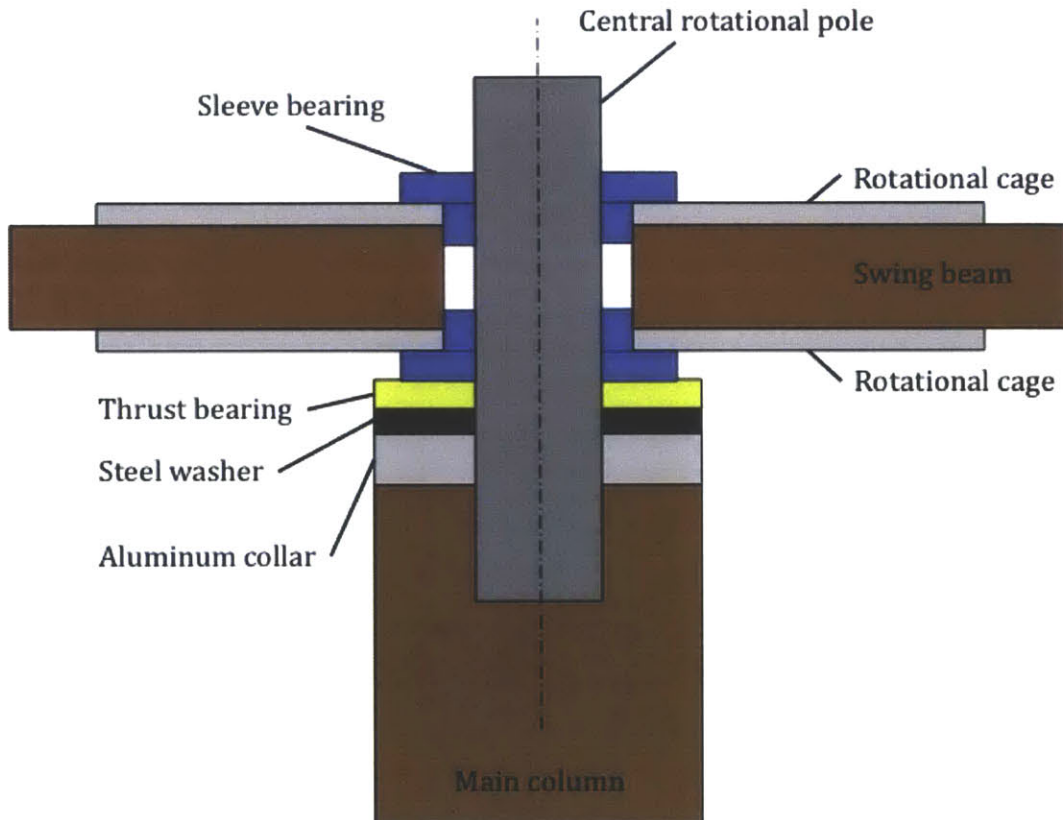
Swing carousel rotational assembly. From bottom upwards: main column 6x6 (brown), steel pole embedded in main column (grey), aluminum retaining collar (light grey), thrust bearing (yellow), sleeve bearings (blue, pressed in plates), and rotational cage. The cantilevered beams, swing cage, and thrust bearings rotate atop the washer and around the steel pole.
